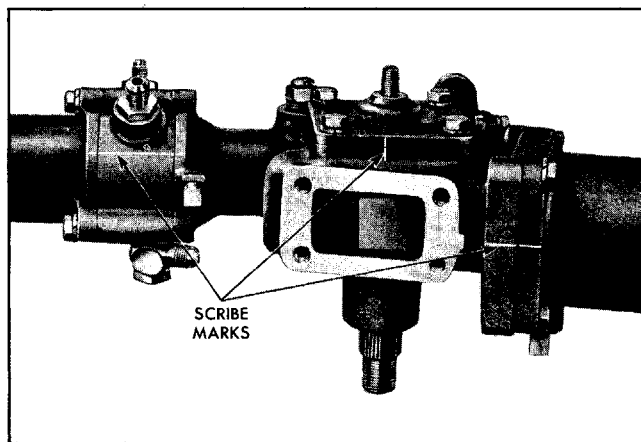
Scribe Marks on Cover, Body and Gear Housing
